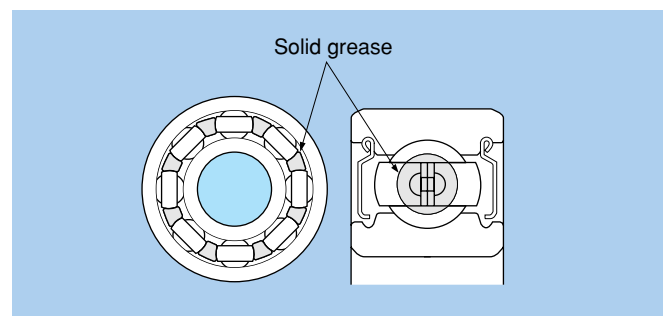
Deep groove ball bearing with spot-pack solid grease (Z shield) (Standard for deep groove ball bearings)
